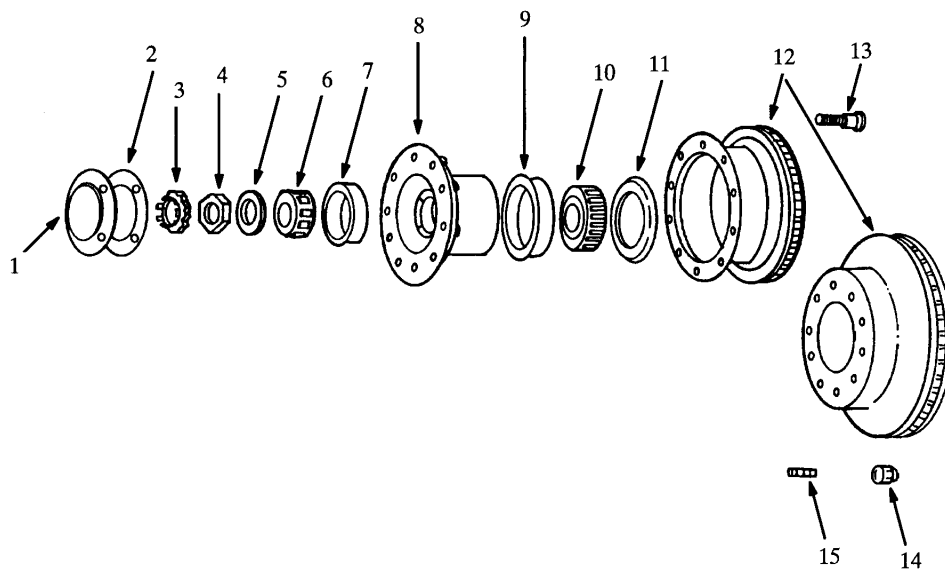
Exploded View of Typical Disc Type Front Hub Assembly with Disc Brakes
